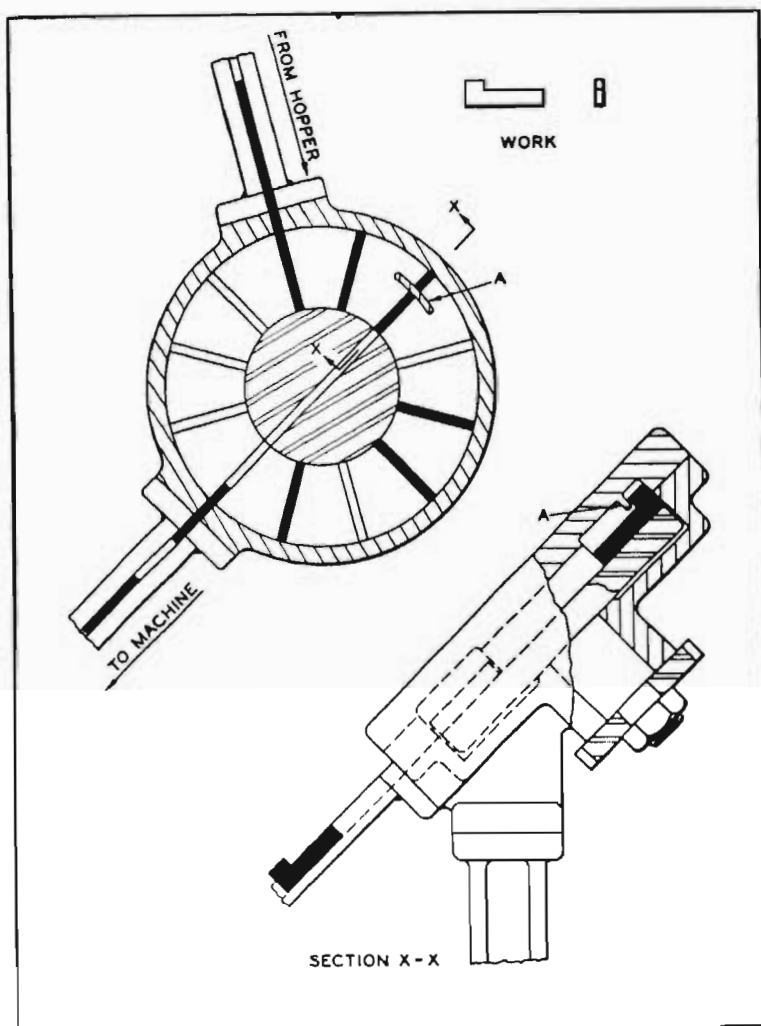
Blade (A) Prevents Hook-Shaped Parts from Dropping Through to a Machine When They are Fed to the Selector in the Wrong Position.
